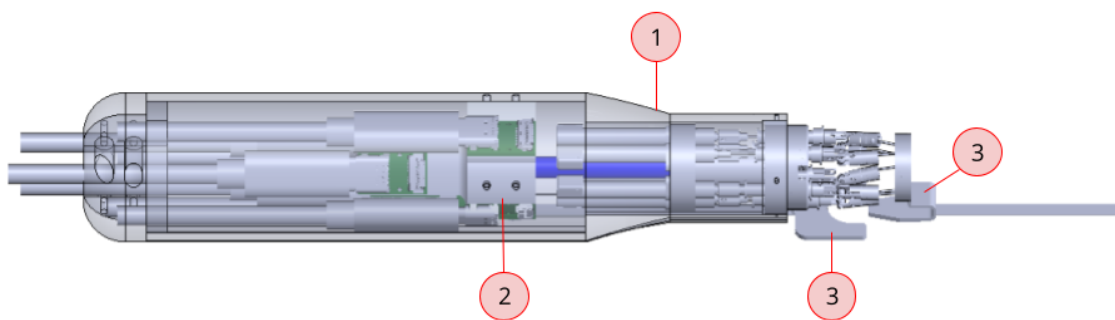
CAD of overall assembly with the following new components: 1) Handle, 2) PCB Mount, 3) Mounts for ASAP Optical Markers.
